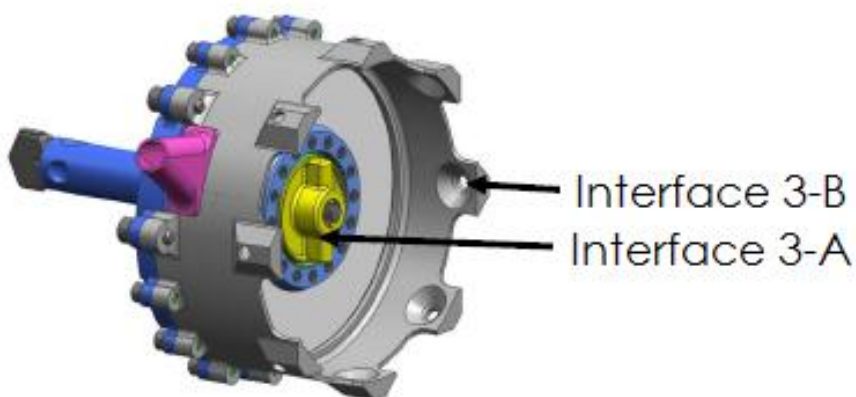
Robotic Arm Interfaces on the Drill Bit Assembly
